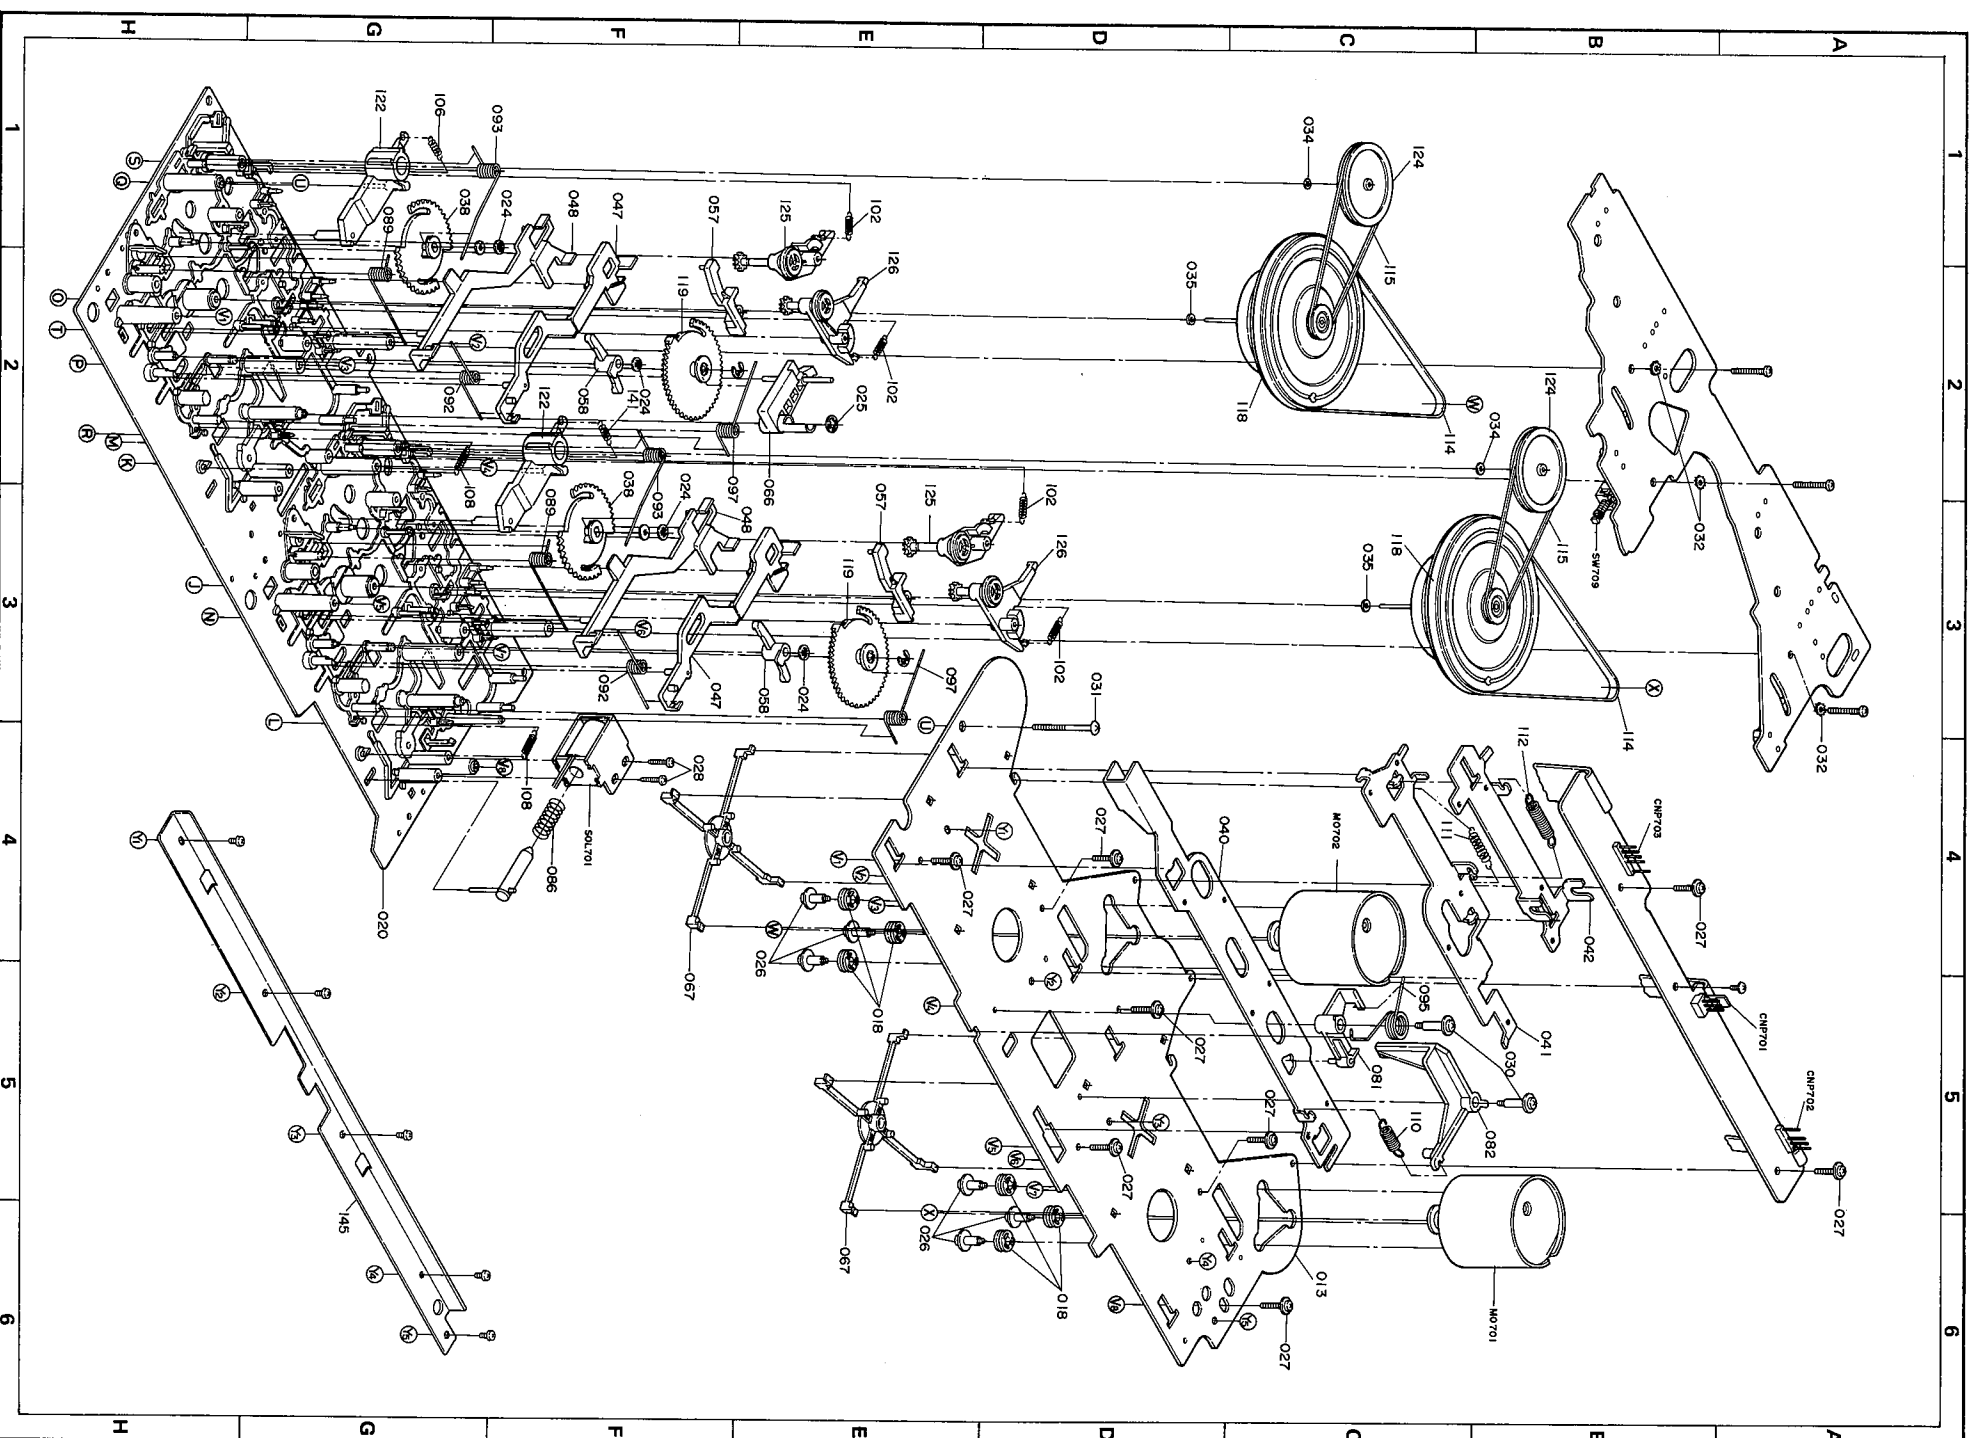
MECHANISM EXPLODED BOTTOM VIEW
